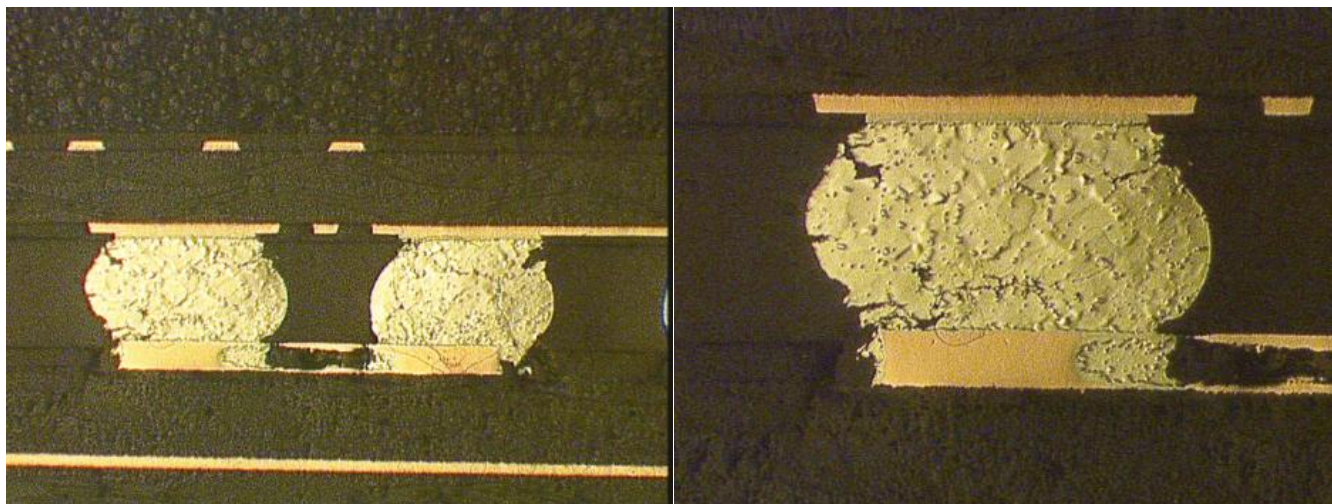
CSP-100 Solder Joints, Board 106, Component U36, SN100C/SAC105, Failed @ 3908 Cycles
